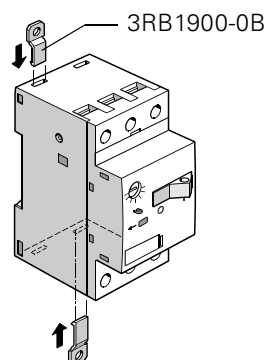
Screw-on mounting of the 3RV1 (example: frame size S00)
